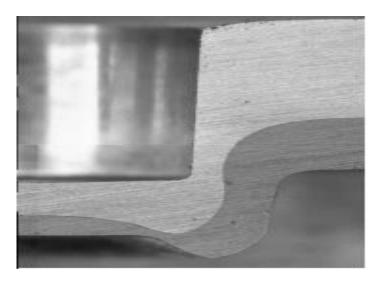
Joining of Aluminium and mild steel sheet using clinching [11]
